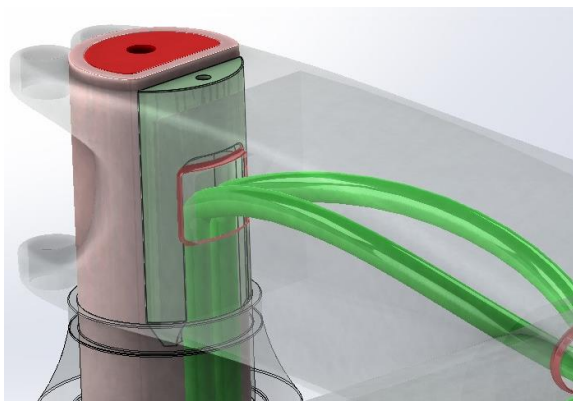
Cable routing through the hole in the clamping surface of the THM Frontale
